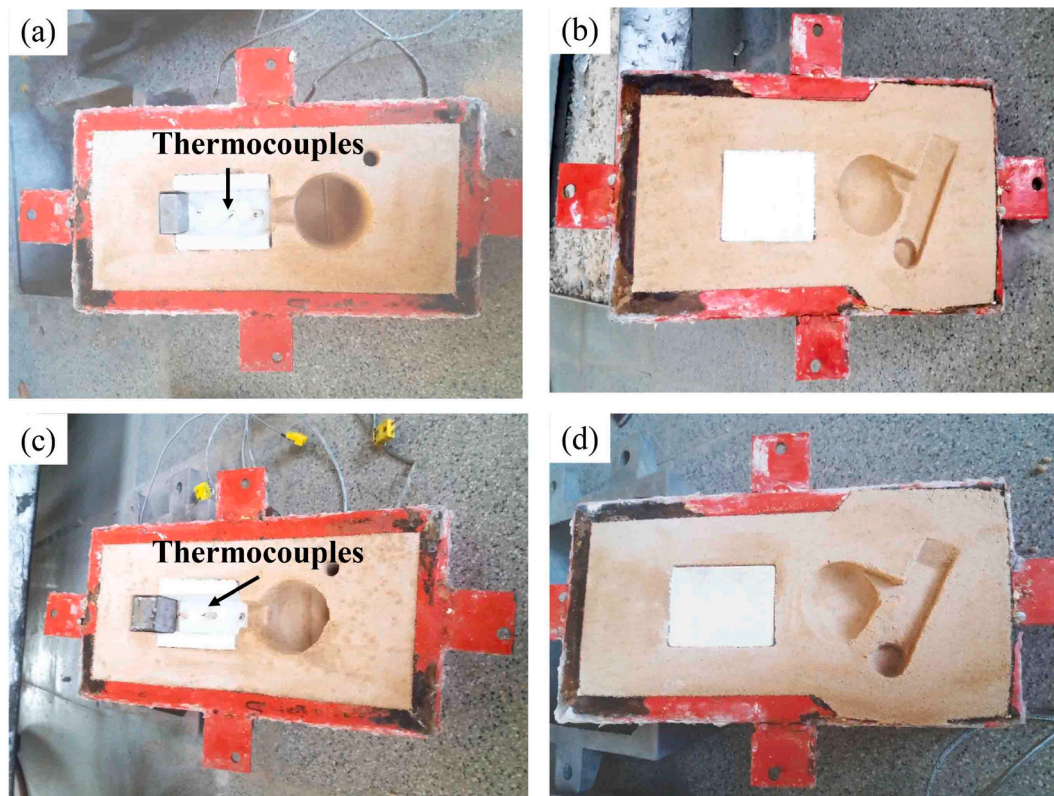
Photographs of a) cope and (b) drag flasks of Chill casting and c) cope and d) drag flasks of PCM casting.
